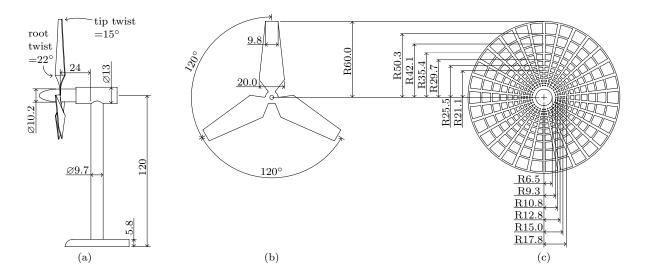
Scale drawings of the geometry of the (a) turbine model with pressed rotor, (b) rotor flat pattern, and (c) porous disk. All dimensions are in millimeters unless otherwise noted. The mounting adapter for the hub of the rotor and disk are is not shown.
